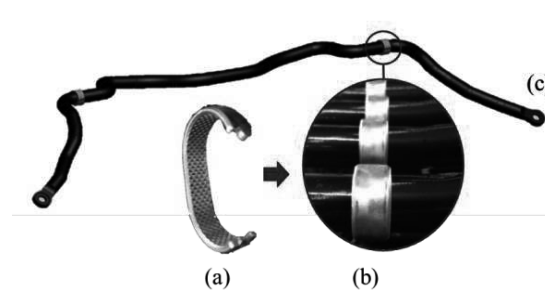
Samples of stopper spring before the assembly (a) after the assembly (b) and the stabilizer bar (c) of the factory in this case study
